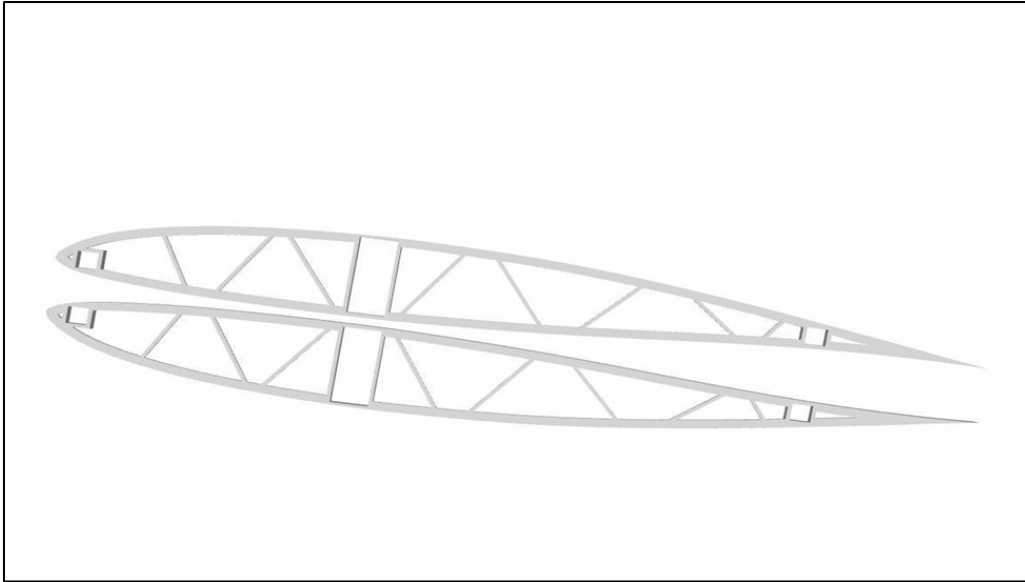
Truss Rib specimen — NACA 6412 airfoil profile, PETG FDM printed
